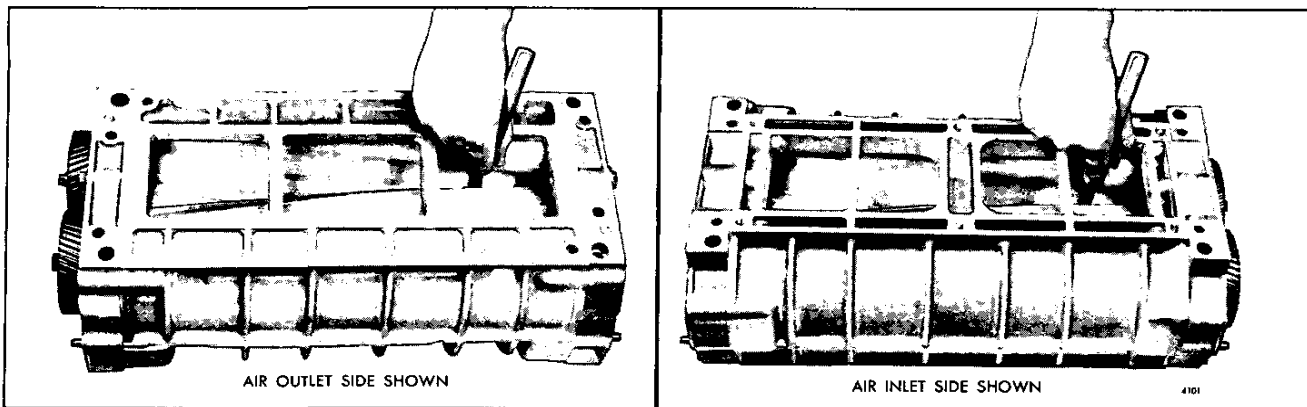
Measuring Clearance Between Blower Rotor Lobes
